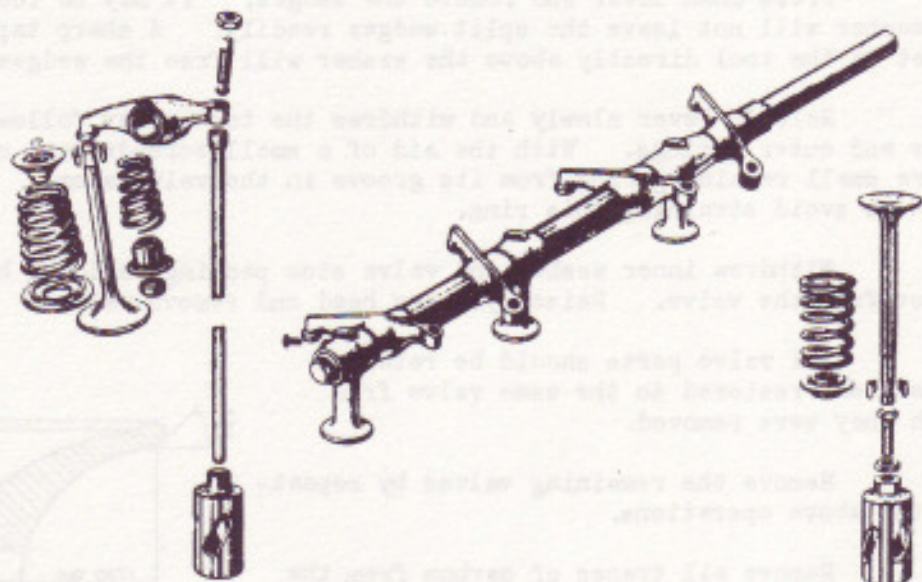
EXPLODED VIEW OF INLET AND EXHAUST VALVE MECHANISM.
